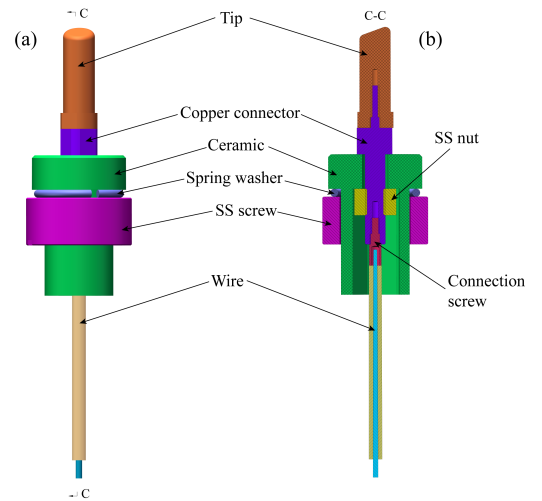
(a) the 3D drawing of an LLP. (b) Cutaway view C-C with cut face shown in (a).
